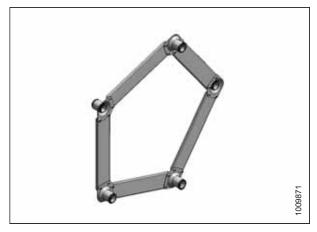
Five-Bat Reinforcing Kit Shown – Six-Bat Reinforcing Kit Similar
